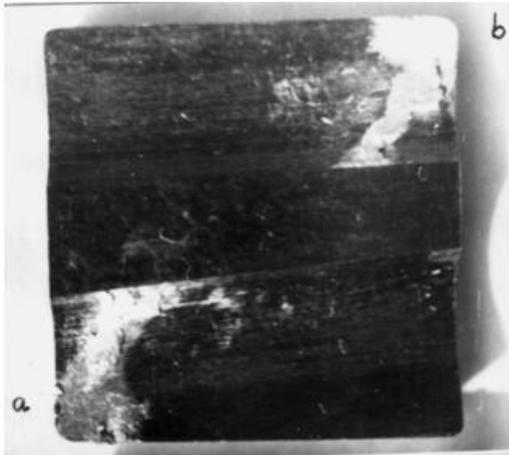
Deposits on cutting edge after turning with $v = 350\text{m/min}$
